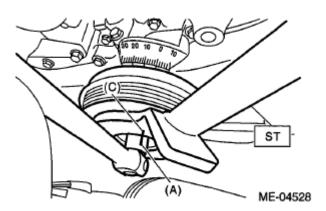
Tightening Crank Pulley Bolt To Reference Line And End Line Courtesy of SUBARU OF AMERICA, INC.
